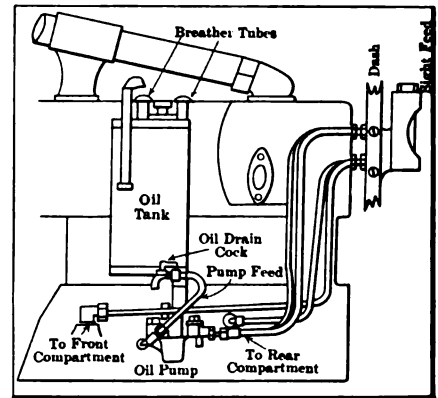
Oil tank and connections for lubricating Packard cars of the latest type
